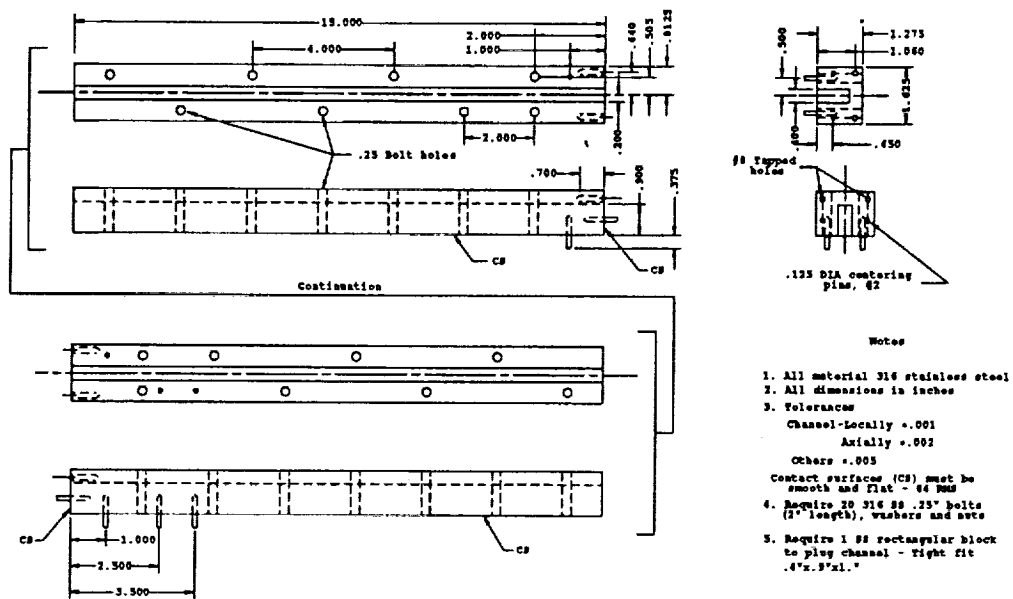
Mechanical drawing for stainless steel, X-band waveguide fixture.
